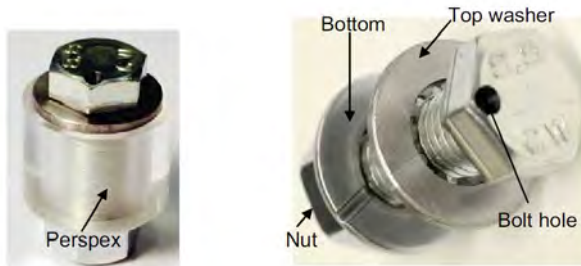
Injection bolted assembly with Perspex to check passage of resin.
